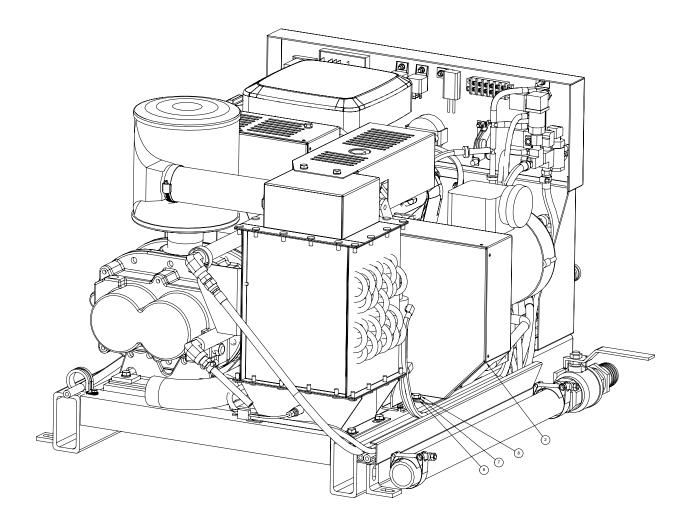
Machine Assembly - Rear View D-6150 Rev -
